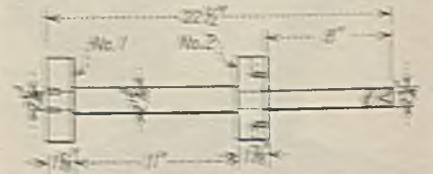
Mandrel assembly for holding cylinder true during boring and threading
